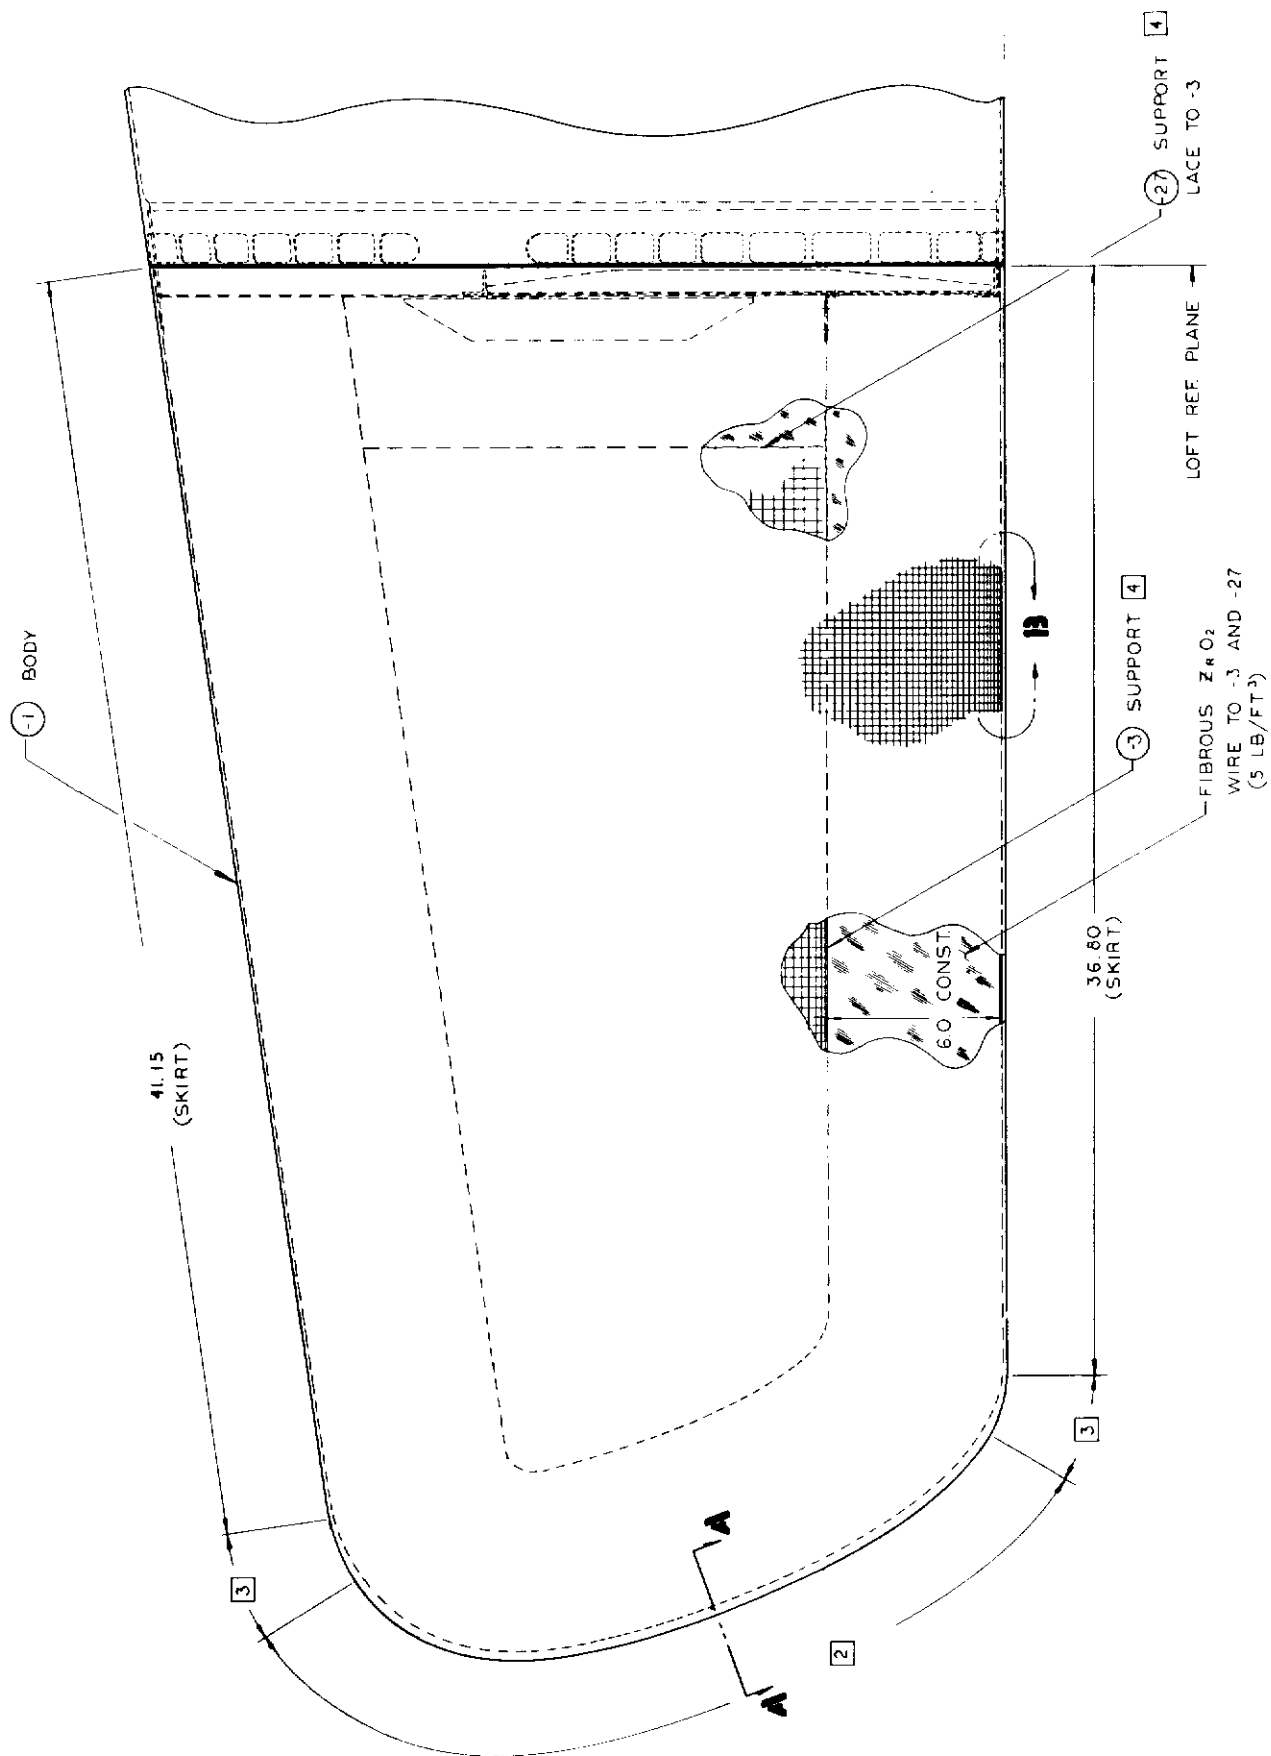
FINAL DESIGN FRONTAL STRUCTURE; Detailed Drawing (Sheet 3 of 6)
